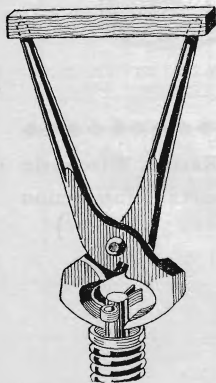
Small piece of wood converts pliers into spring compressing tool.
